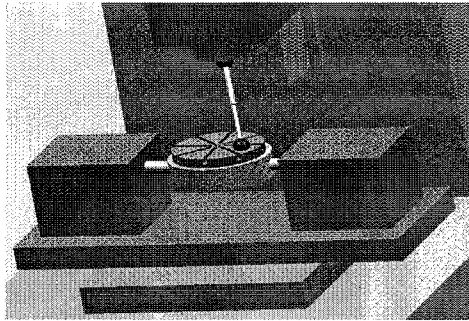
Matsuura machine tool with a ball-bar set-up.
